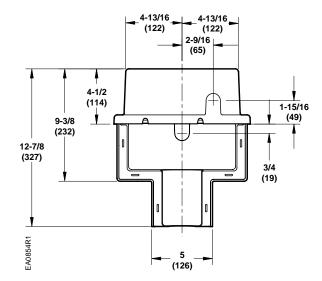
Dimensions of 599-10071 Weather Shield in Inches (Millimeters).
